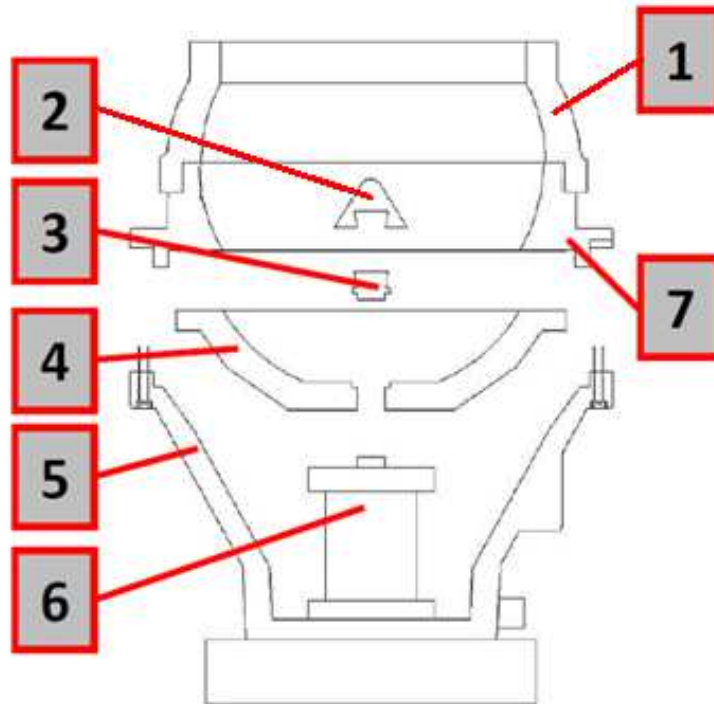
Parts of the disc finishing machine. *Source: Instructions of Avalon disc finishing machine, model EC10
